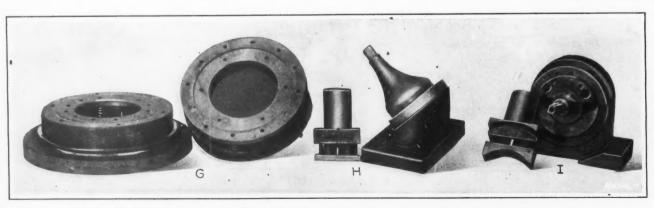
(G) Flange Trimming Die; (H) Die used to perforate Hole F, F g. 4; (I) Die for perforating Hole G. Fig. 4
